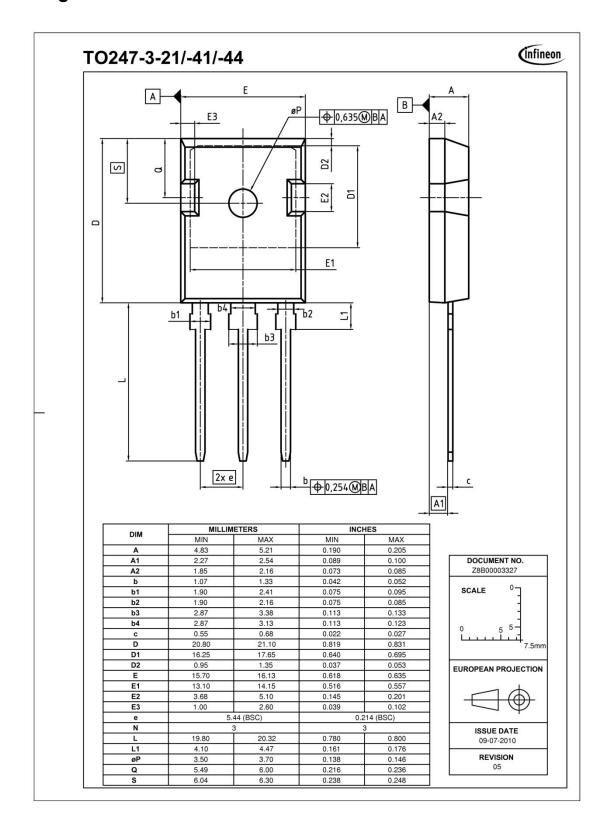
Outlines PG-TO247-3, dimensions in mm/inches
